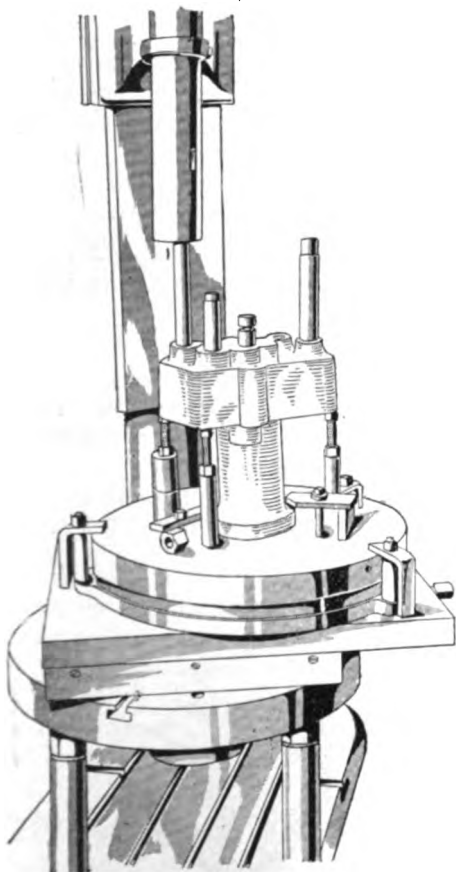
LOCATING MULTIPLE SPINDLE HOLES
